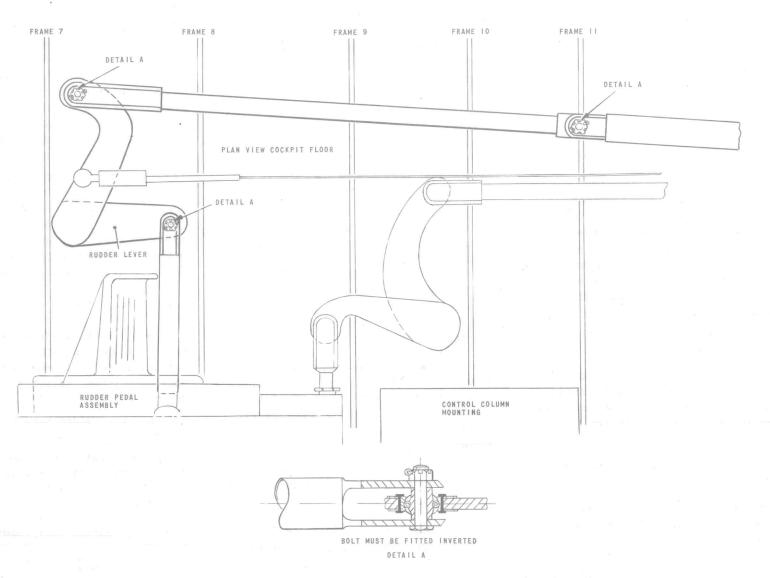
LEVER ASSEMBLY - FRAMES 7 - 11
